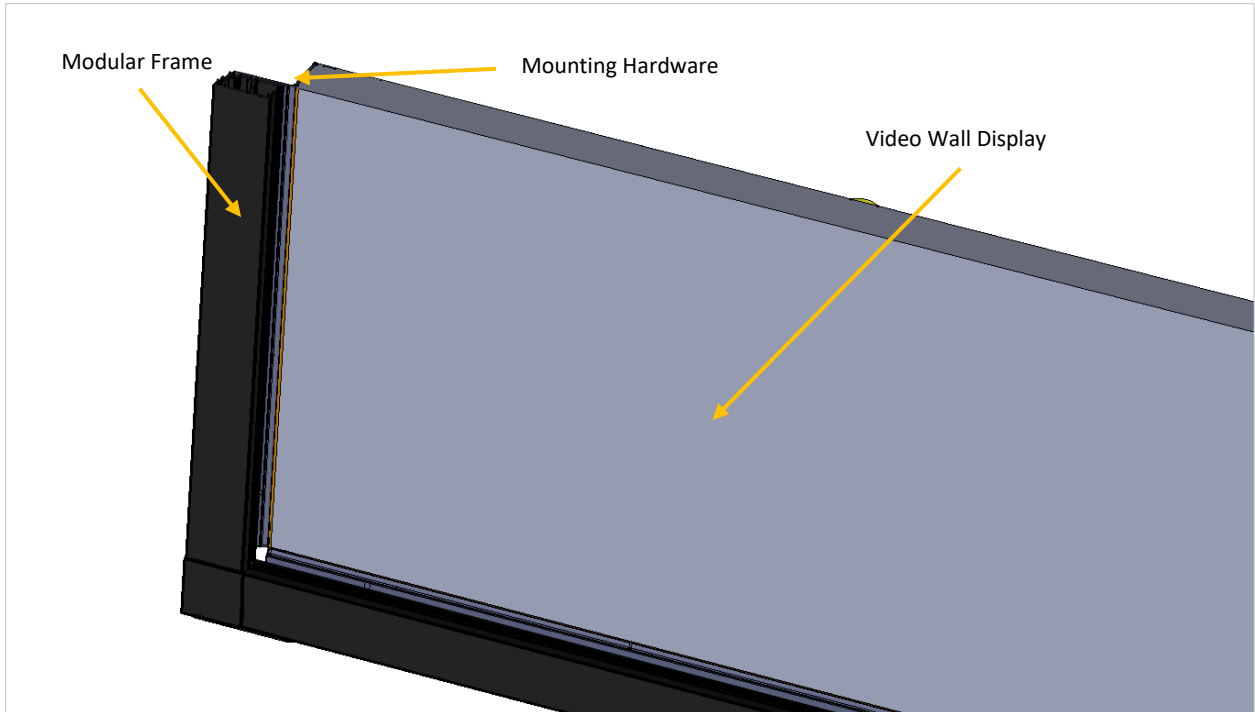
Hardware Mounting Option - Front View of Bottom Left Corner
